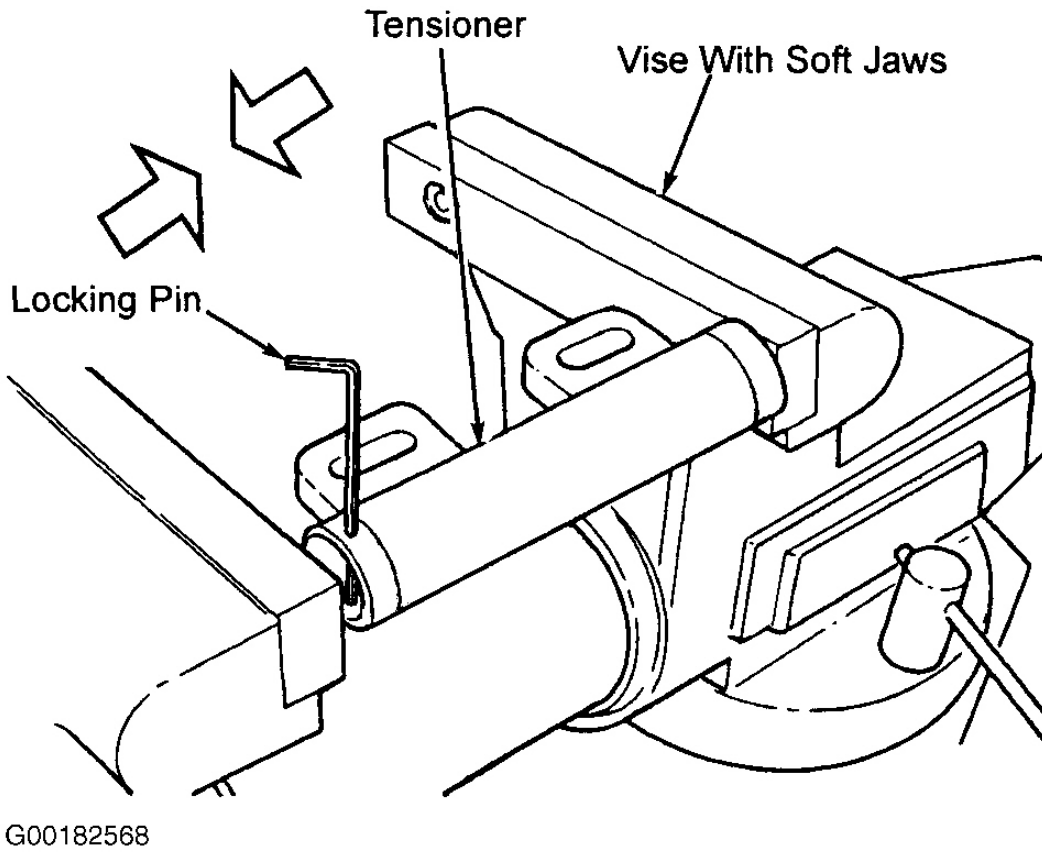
Compressing Hydraulic Timing Belt Tensioner
